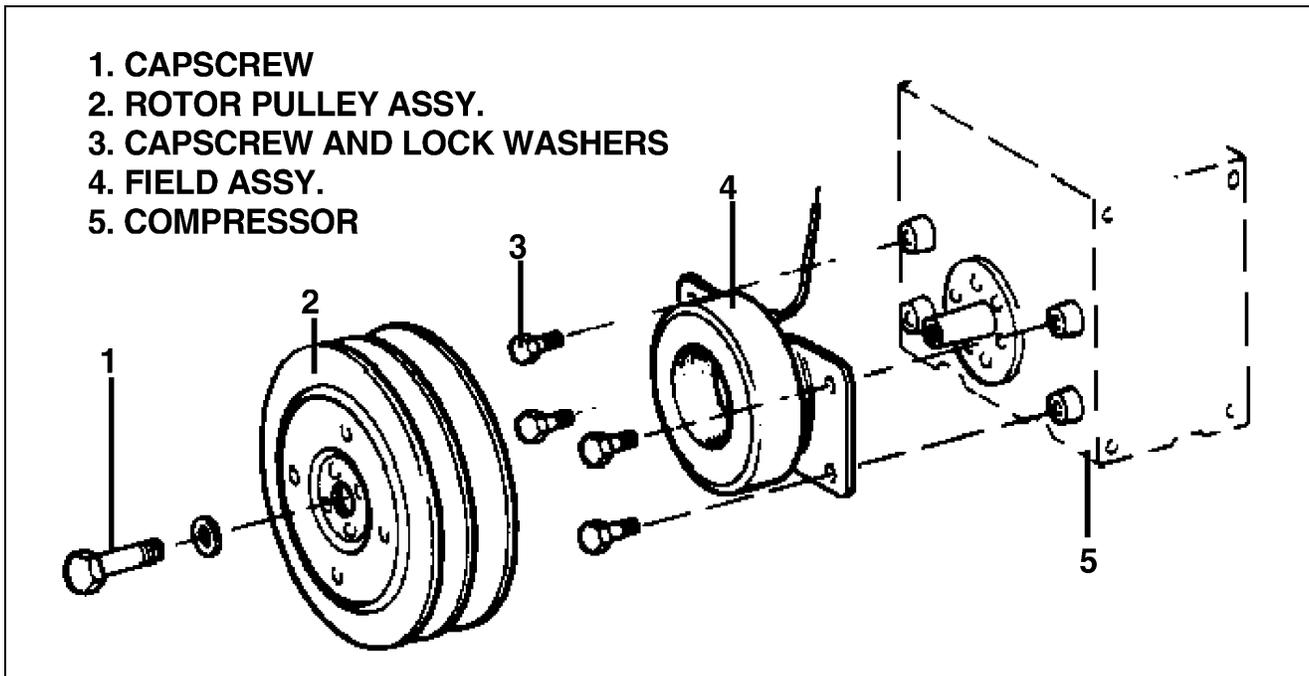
York Magnetic Clutch (HP S/N's 3246001 thru 3246087 only)
